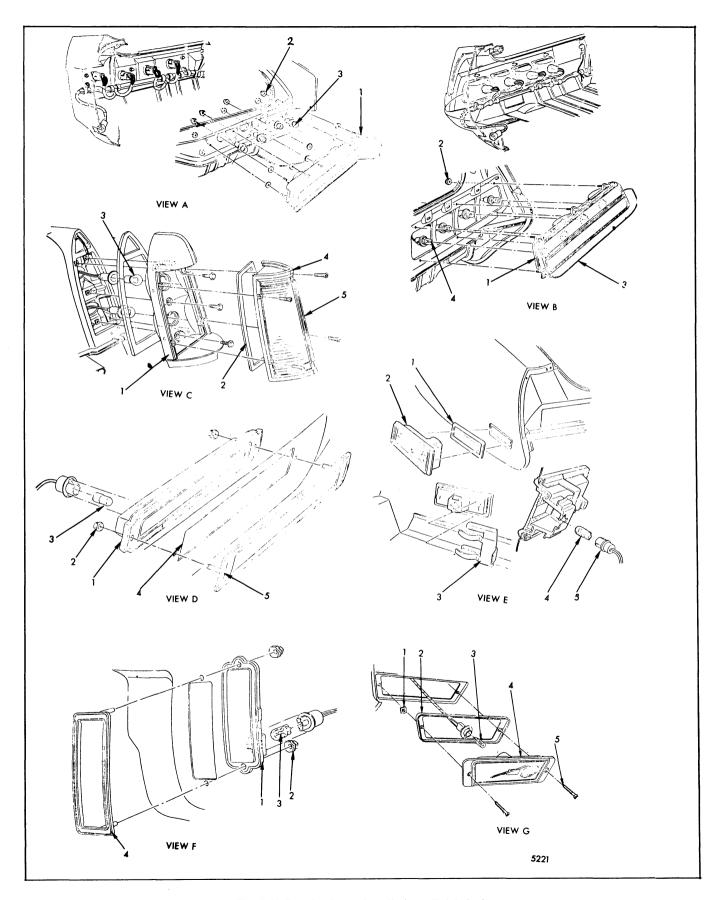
Exterior Lamp Installation - Buick Styles
